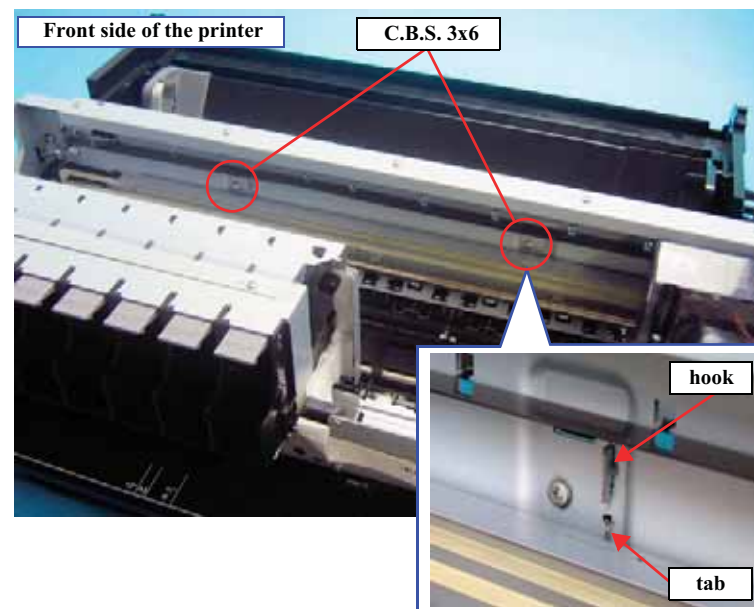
Screws, hooks and tabs that secure the GUIDE, ROLLER, LD
